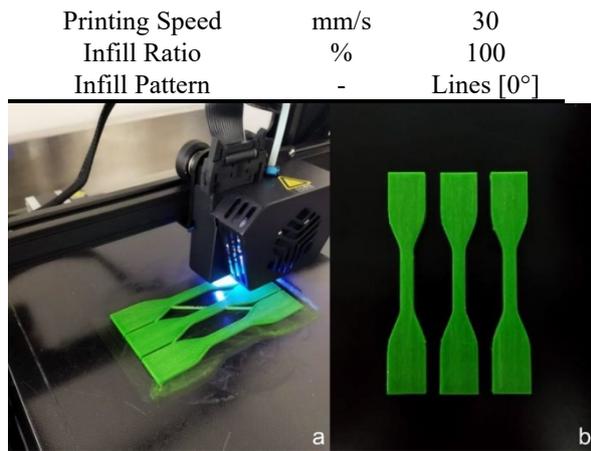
Preparation of tensile test specimens; (a) during printing, and (b) printed specimens.
